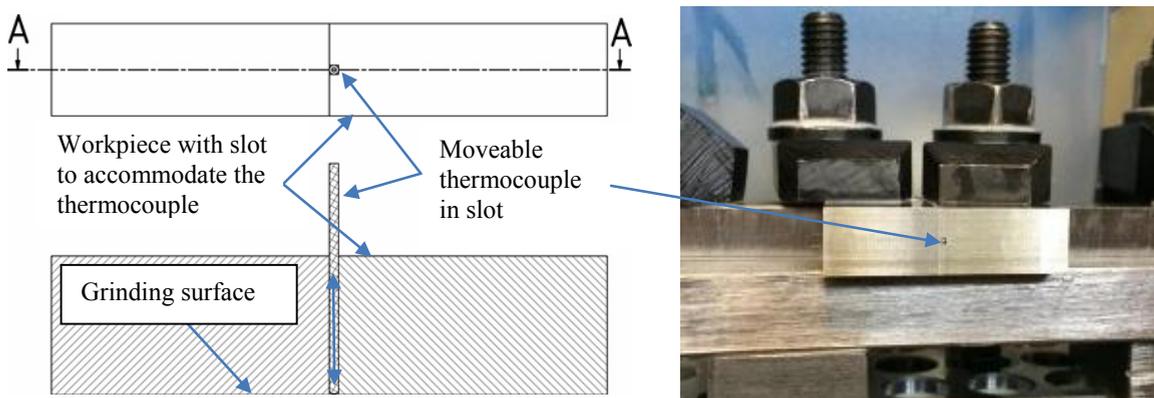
Experiment setup with cross-section of the workpiece and thermocouple in the slot; left and mounted on the machine; right.
